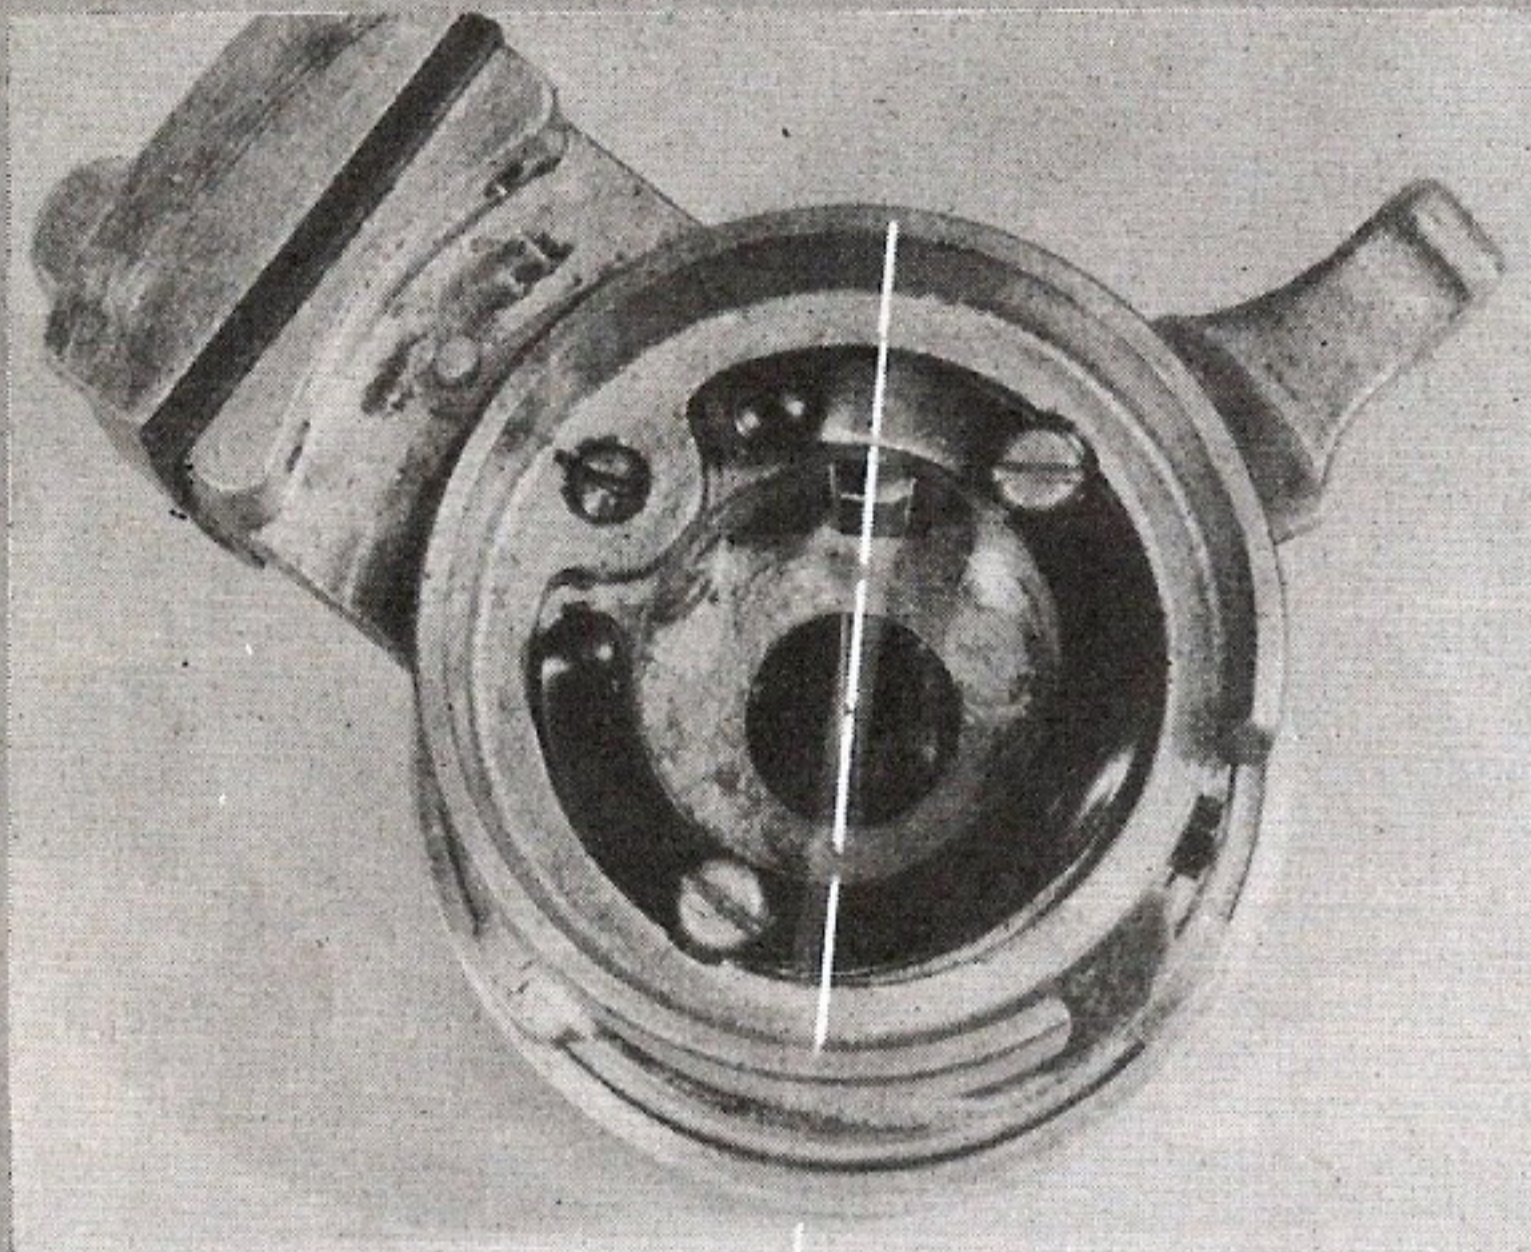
Here's the backside of the breaker-point assembly removed from the magneto housing. Place a straight-edge (dotted line) across the assembly—bisecting the center screw and the cam follower. Prick punch as at left, above.
